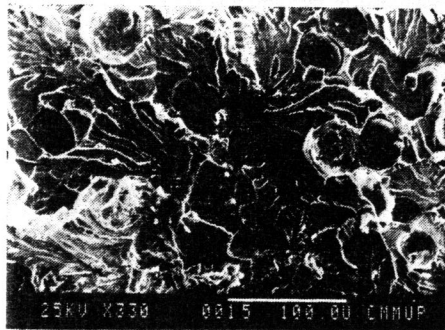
Unnotched Charpy fracture surfaces obtained at 47°C. No dimples can be seen.
